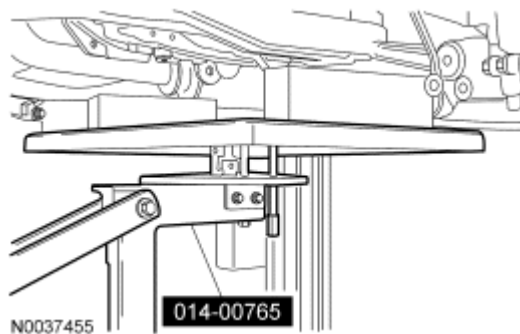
Positioning Special Tool (014-00765) Under Subframe Assembly
